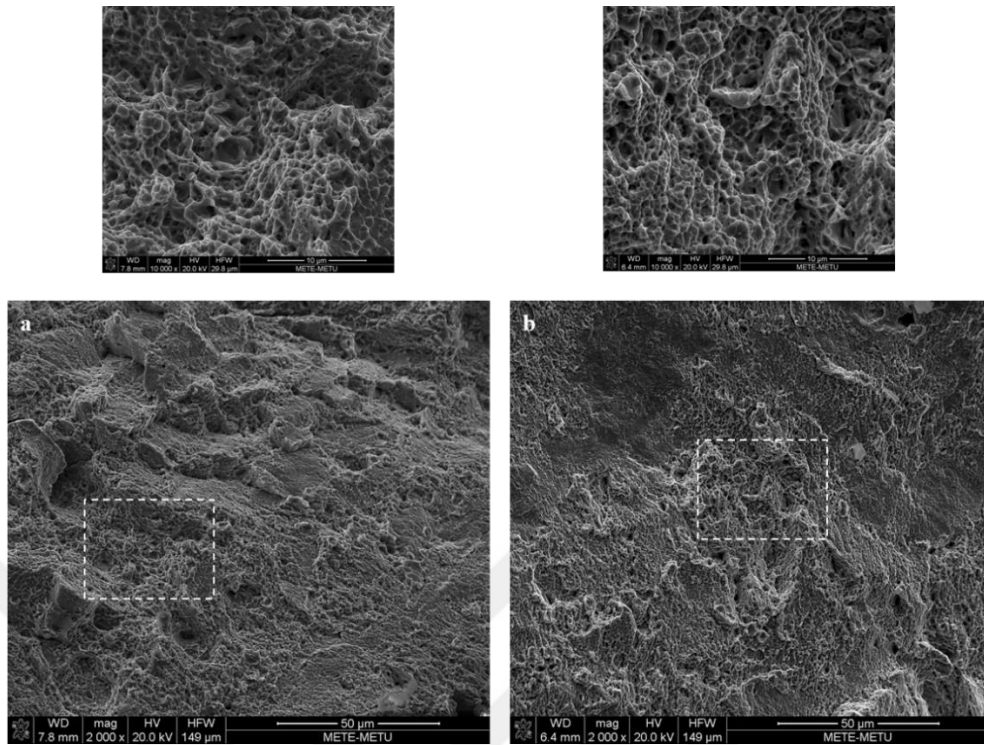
Fracture surfaces of the heat treated Inconel 718 alloys tested at 600 °C
